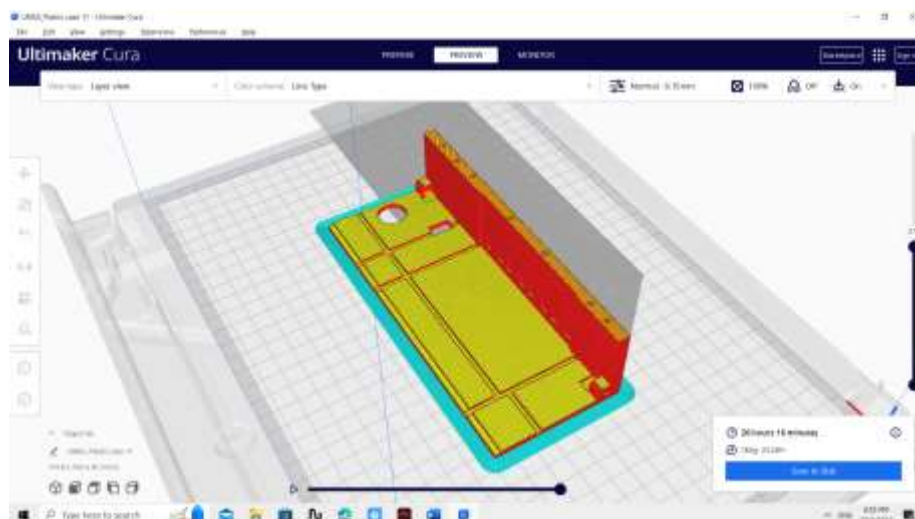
The Casing of the Battery Module Is Divided into Two Parts for Printing.
